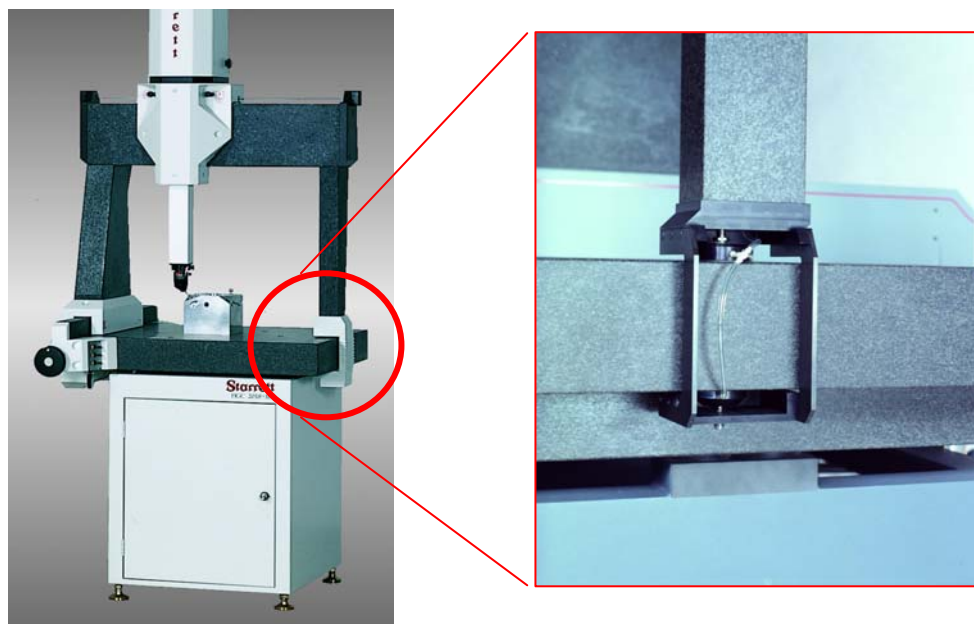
New Way® Air Bearings on a Coordinate Measuring Machine
